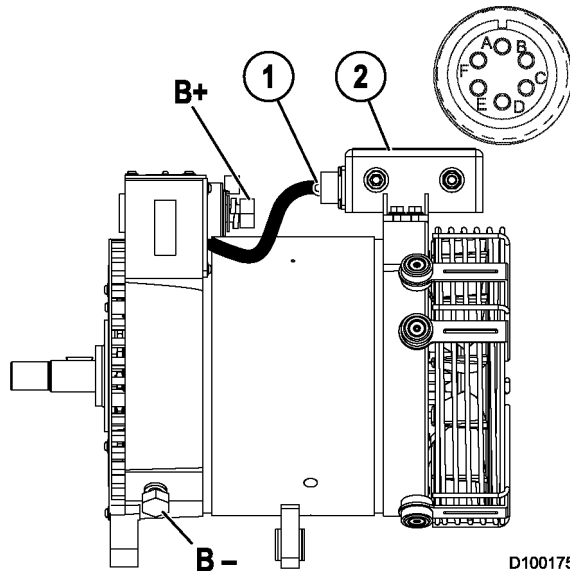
WIRING HARNESS PLUG JUMPER WIRE CONNECTION
